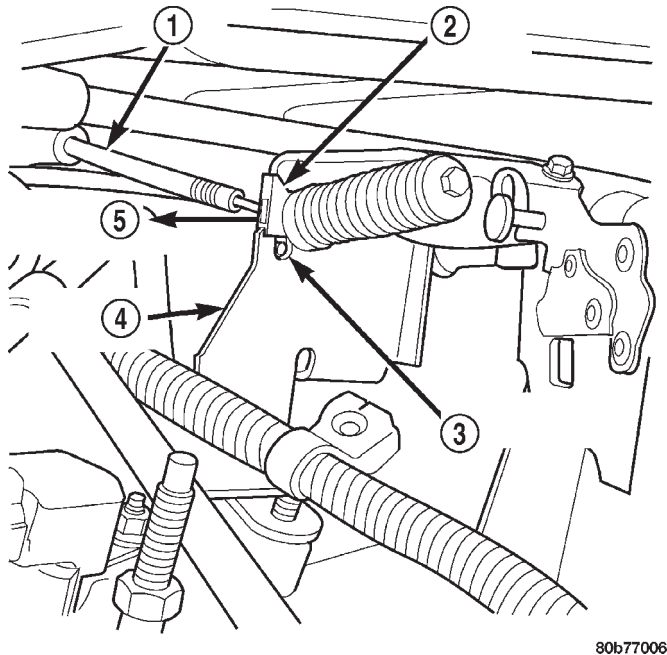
Accelerator Cable Release Tab—4.7L V-8 Engine
